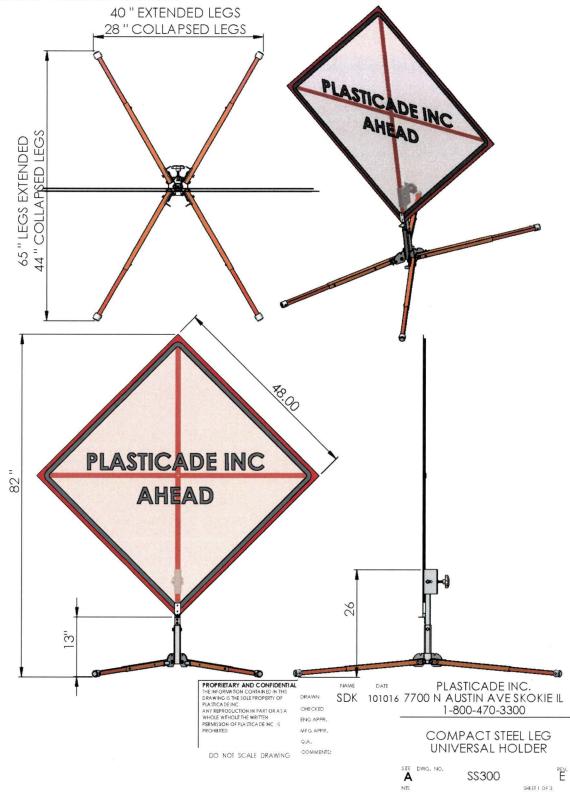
Plasticade® SS300 Technical Drawing (Sheet 1 of 3)
